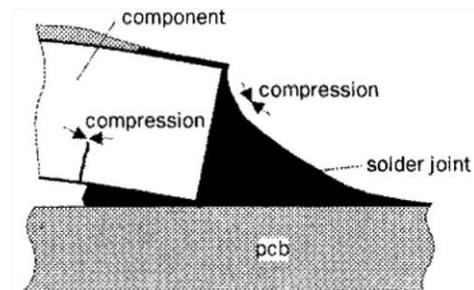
Stress on component and solder joint: Situation is true for lower cycle temperature or a concave bending of PCB
